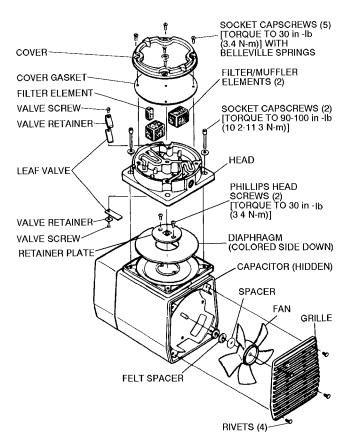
Assembly/Disassembly of the Purge Pump or Regenerating Pump
